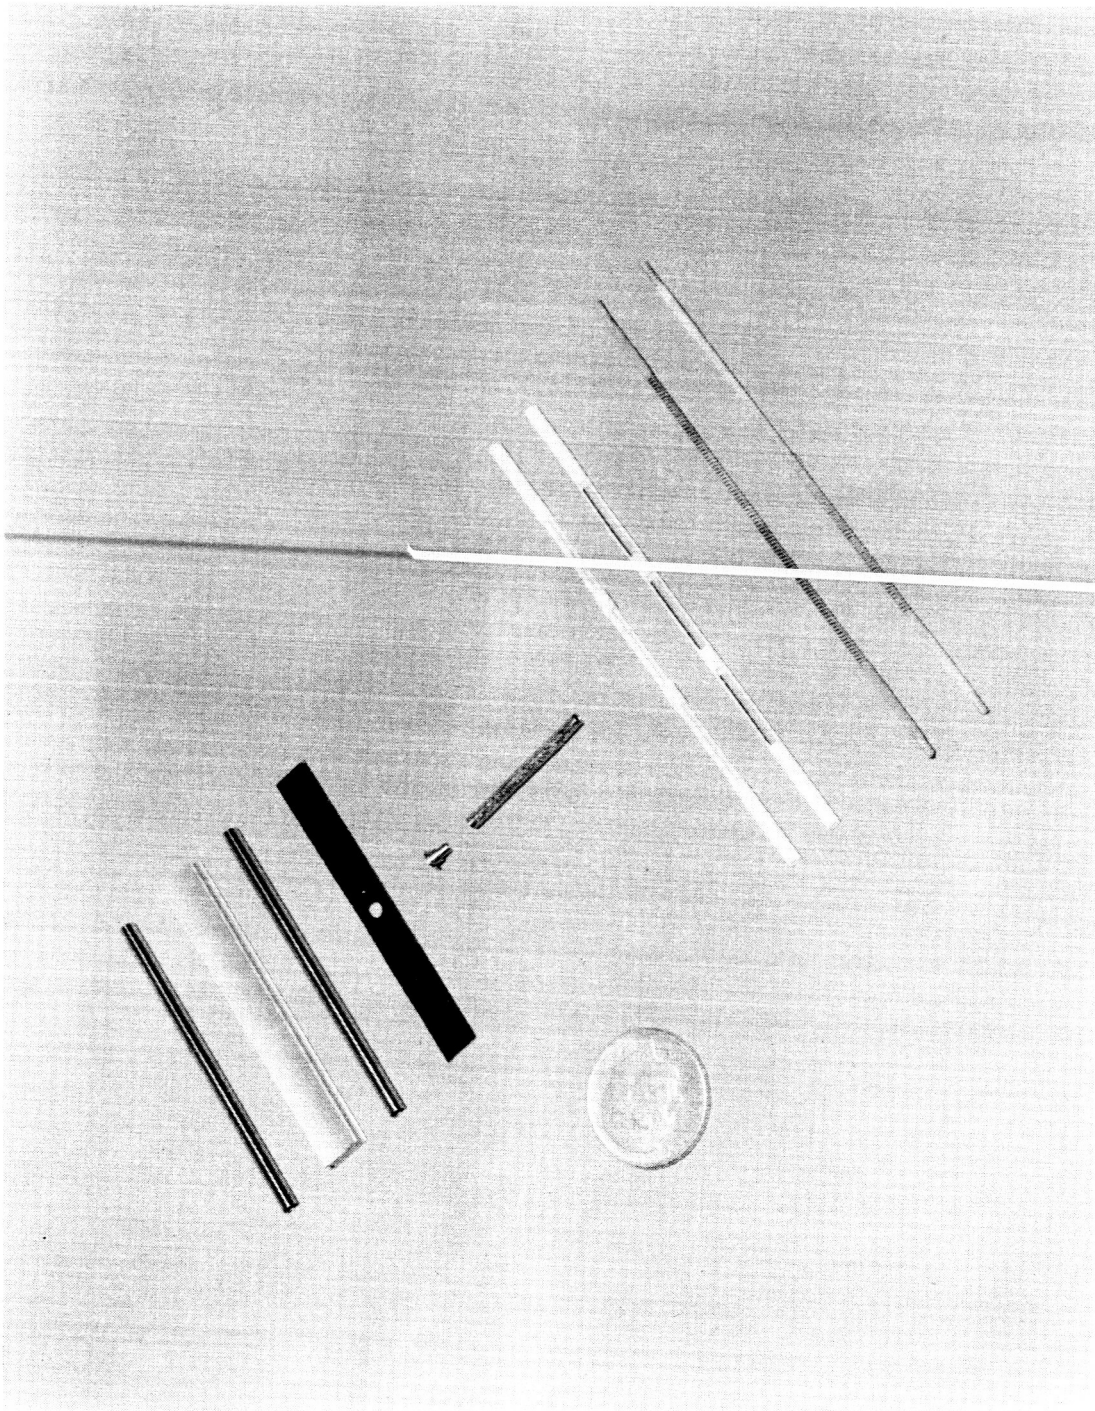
Parts comprising the basic elements of a low-mass ionizer.
